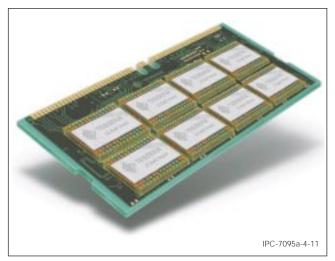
The Standard SO-DIMM Memory Card Assembly
